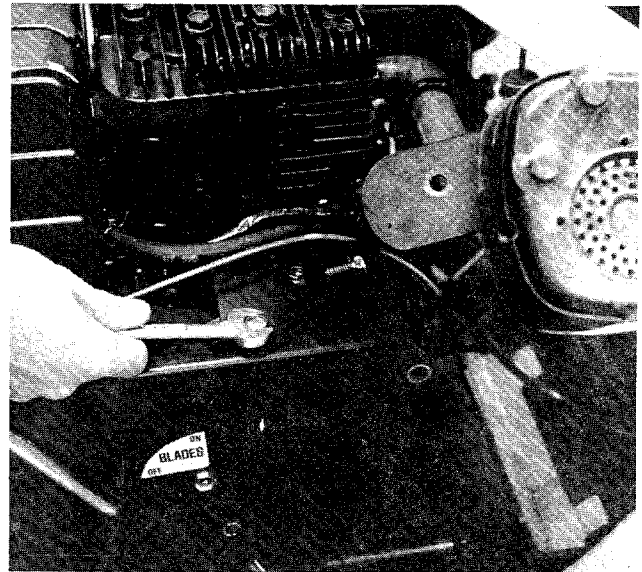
EXTENSION SPRING ASSEMBLY
